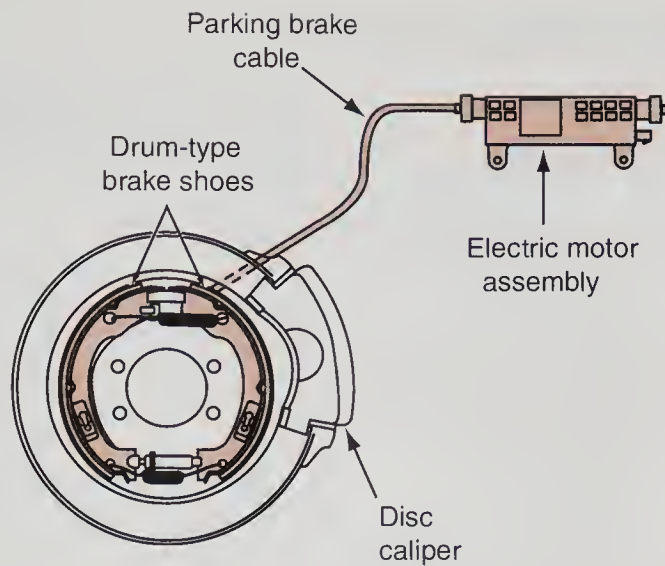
This electric motor assembly pulls on the cables to apply the parking brakes.
